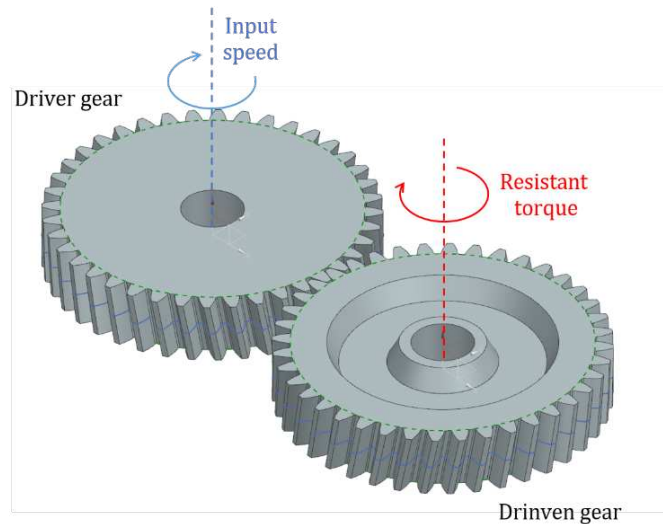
MB model of the considered lightweight gear transmission: the driver gear design is fixed and full while the driven gear is parametric and lightweight.
